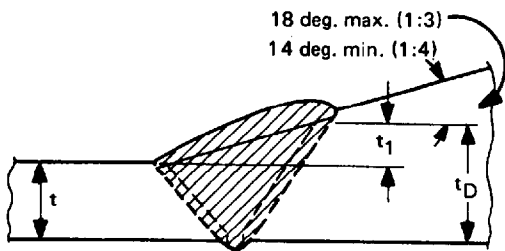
BEVEL FOR OUTSIDE THICKNESS¹⁻⁴
